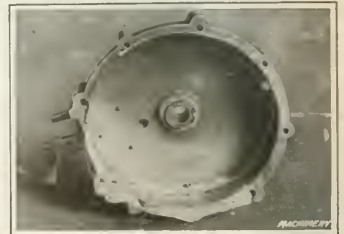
Same Crank-case as shown in Fig. 8—Finished Weld on Inside
